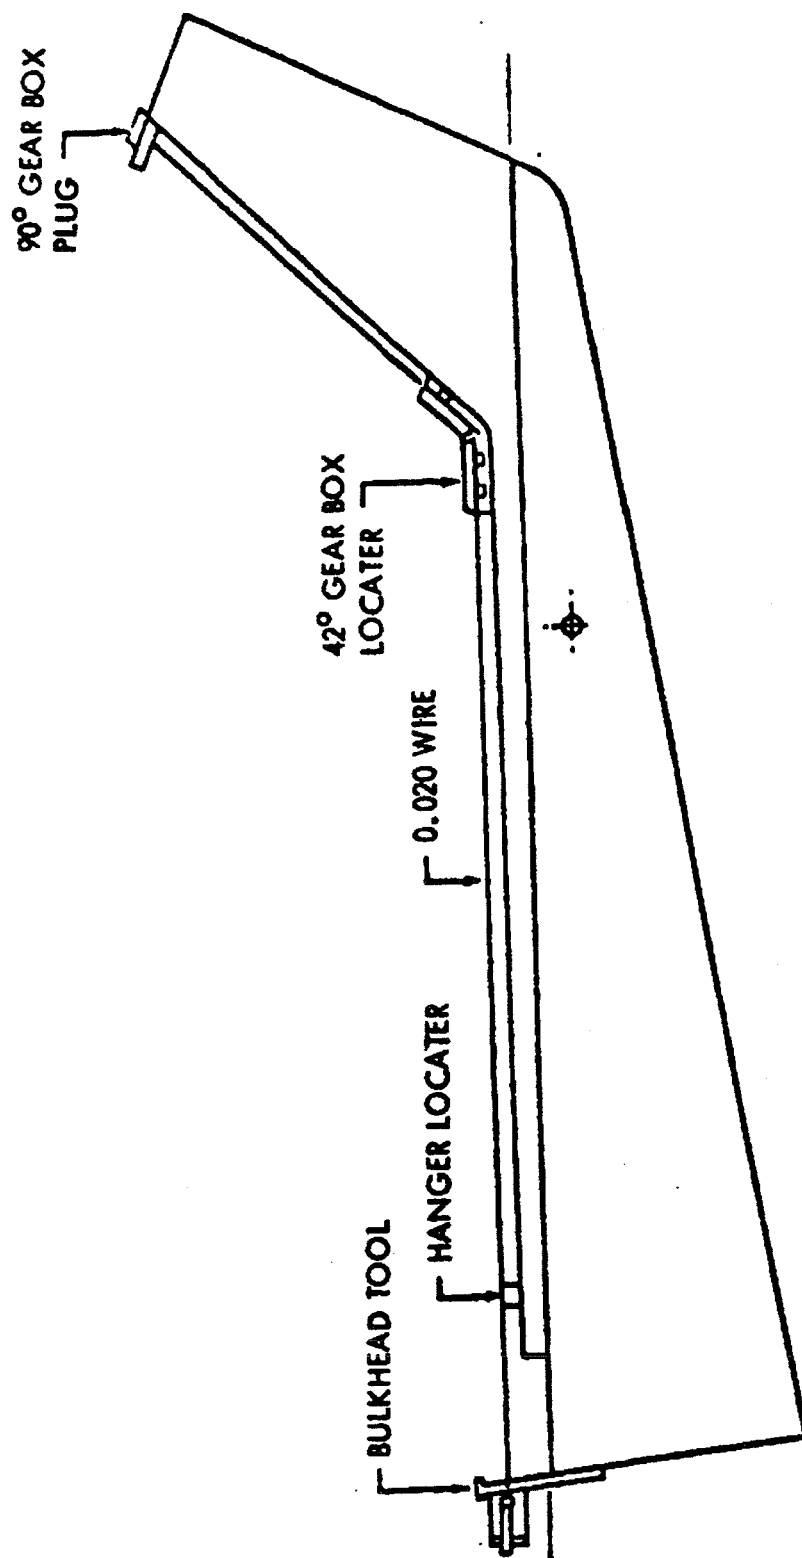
ALIGNMENT OF DRIVE SHAFT HANGER AND 42° GEAR BOX
